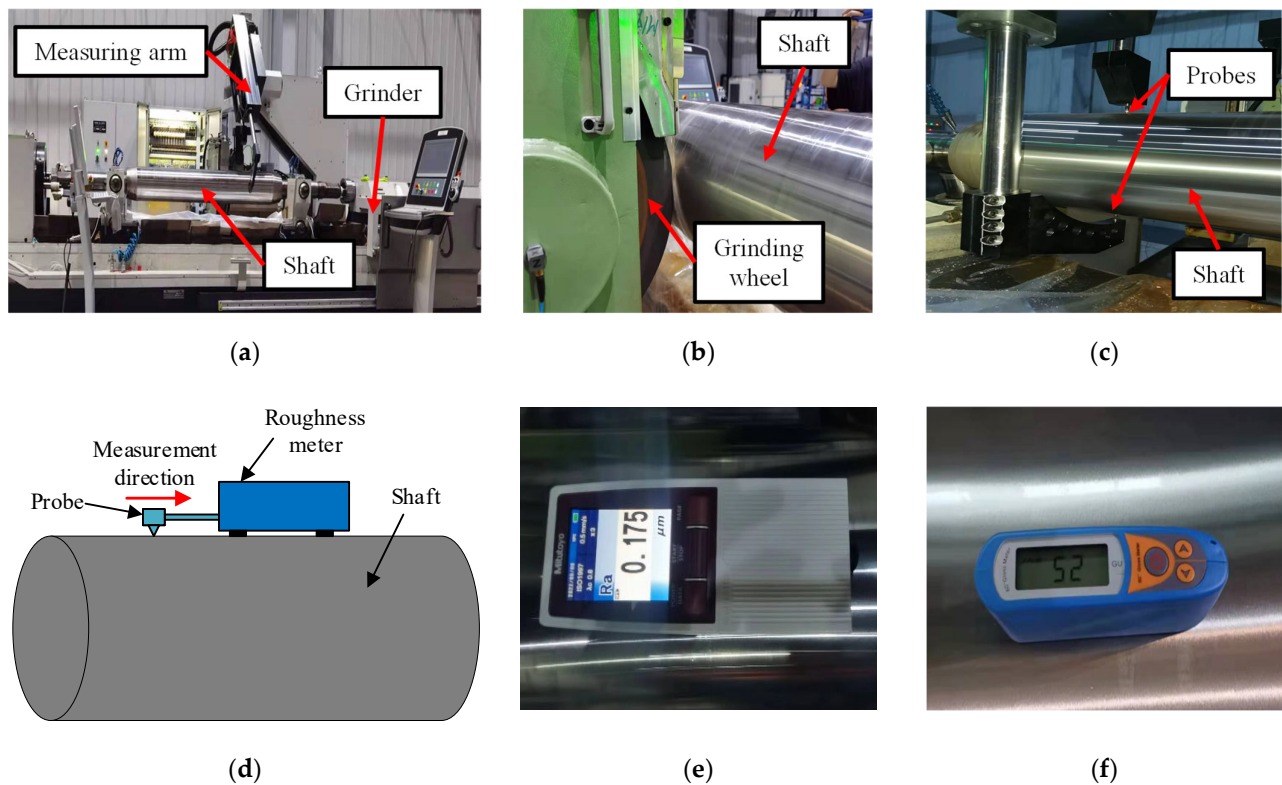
The grinding system and testing instruments: (a) grinding system, (b) grinding process, (c) diameter measurement, (d) roughness measurement, (e) roughness meter, (f) glossiness meter.
